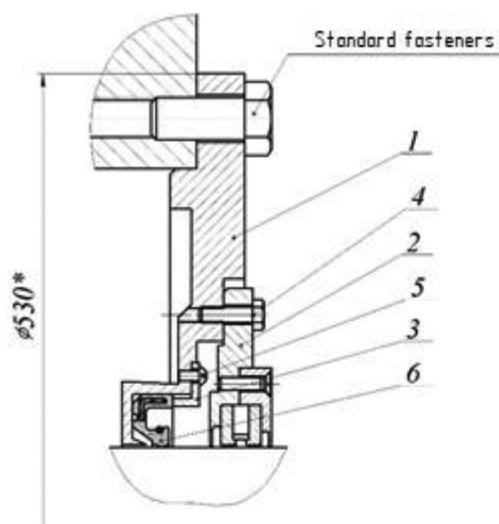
Magnetic fluid sealing complex of bearing assembly fan БЦ-25: 1 – intermediate flange; 2 – M10 bolt; 3 – MFS; 4 – bolt M5; 5 – cutting ring 6 – cuff 250 × 290
